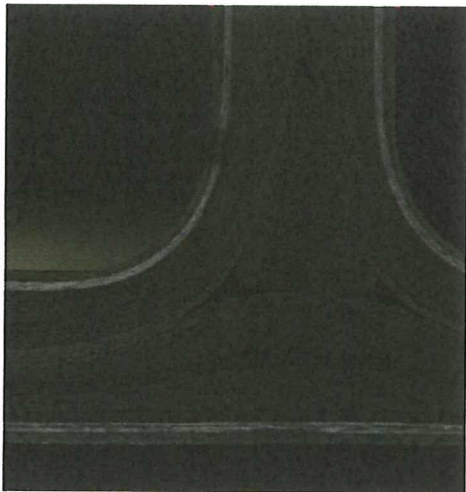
Wedging of the filler material between the two stringers halves in stringer 3
